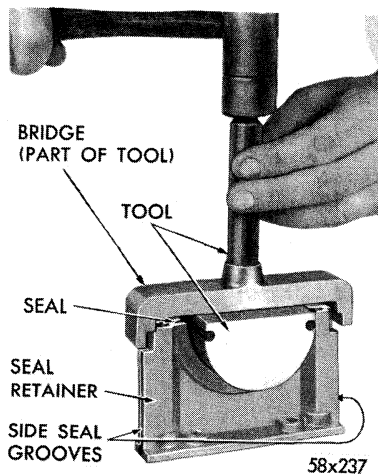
Installing Rear Main Bearing Lower Oil Seal
